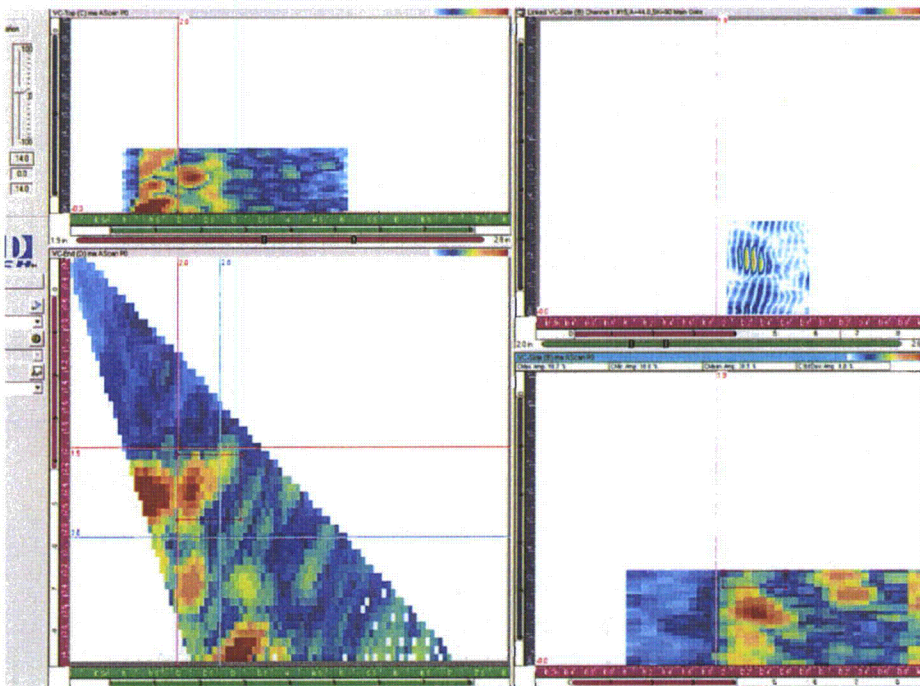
B519 as Inspected From the Equiaxed Side of the Weld with Merged Data, Showing a Yes Detected
